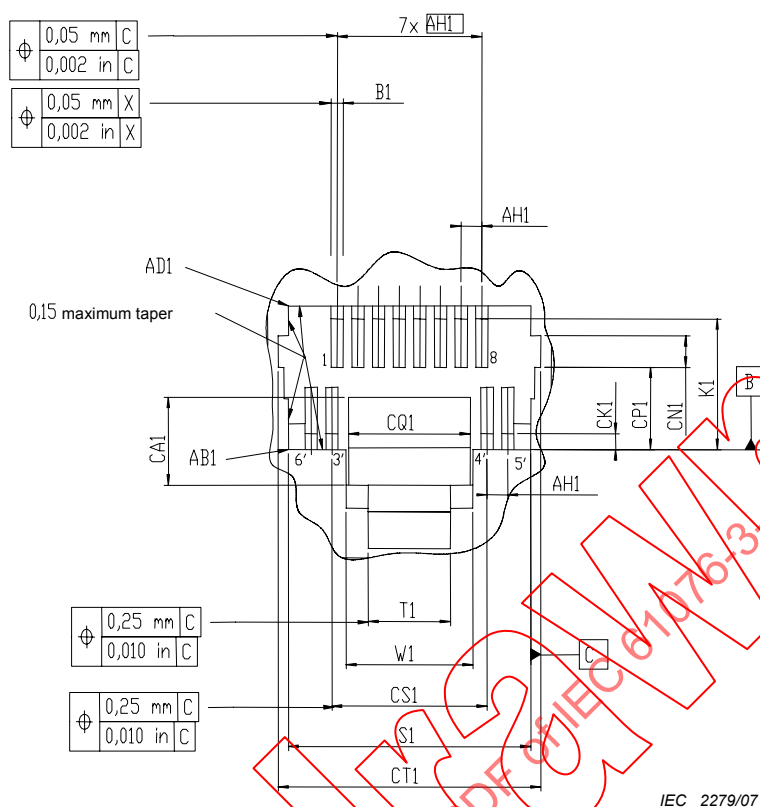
Physical interface, fixed connector, front view – Dimensions
